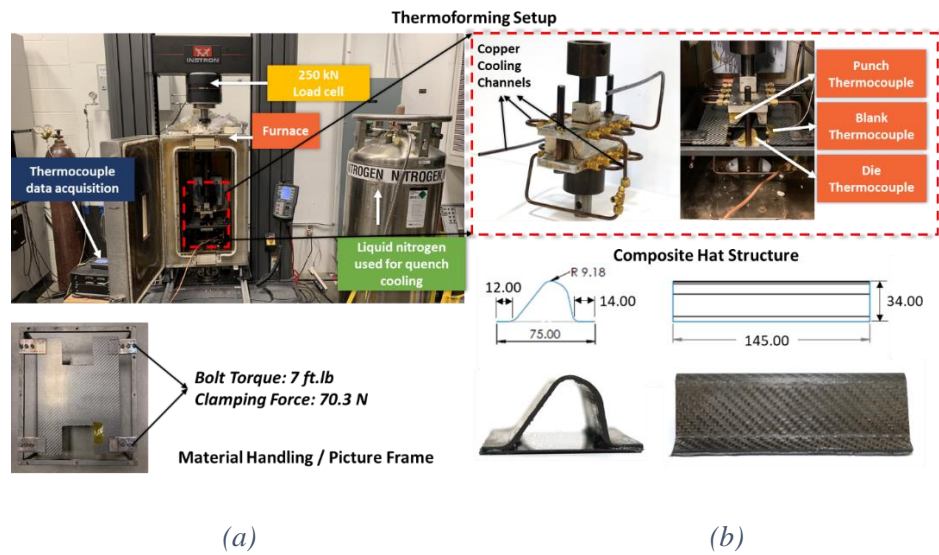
(a) Thermal chamber equipped with thermocouple data acquisition system and liquid nitrogen cooling for thermoforming tests, material handling system with binder tabs holding the blank. (b) thermoforming setup showing copper cooling channels, thermocouple locations and thermoformed hat structure in cross-section view and side view.
